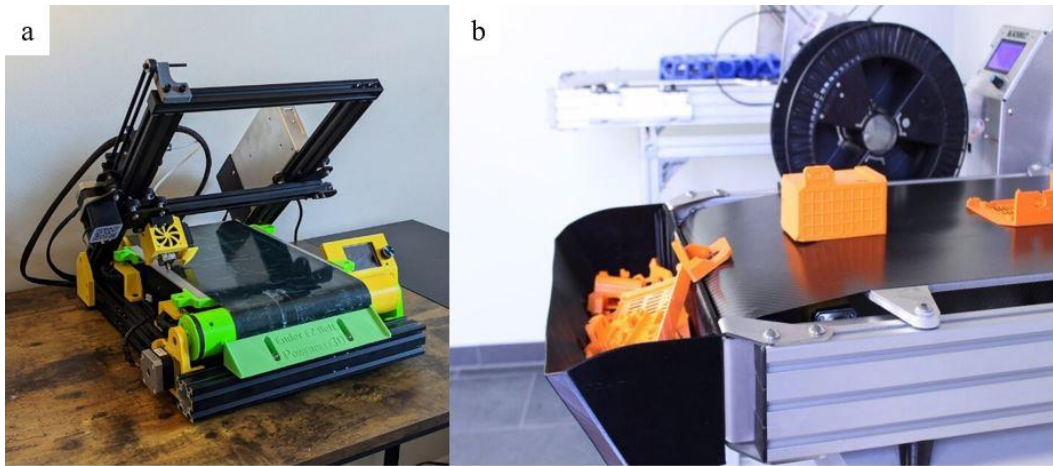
Representations of (a) Conveyor 3D Printer (credit: Powerbelt3D) [128], and (b) Conveyor 3D printer conveying printed parts into a collection unit [129] to allow for continuous printing, and thereby eliminating stops usually used for part removal and printing restarts.
